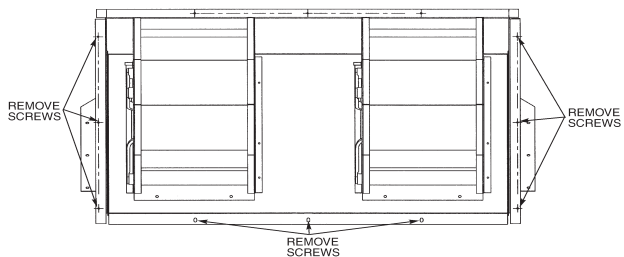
Power Exhaust or Barometric Relief Damper Mounting Details
